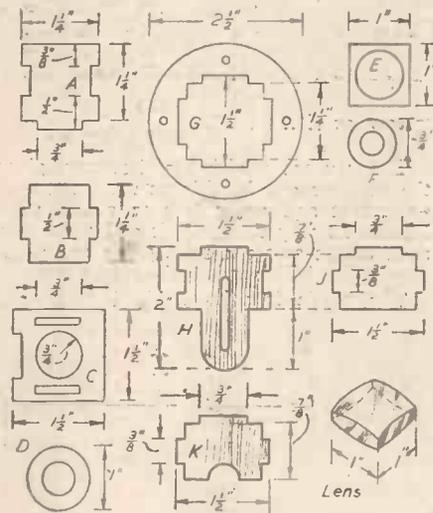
Lens holder and sleeve parts with details of lens used.
